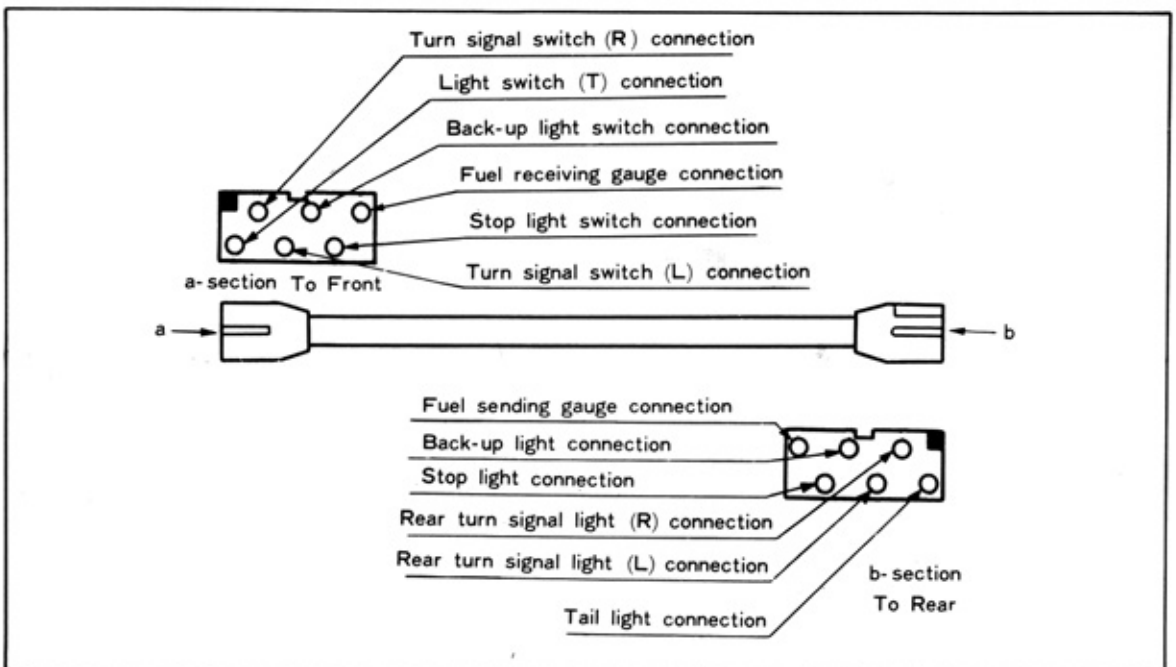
Chassis Wiring Harness (COROLLA 1100)
